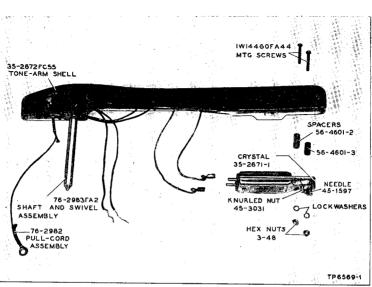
Record-Changer Tone-Arm Assembly, Part No. 35-2663-2
